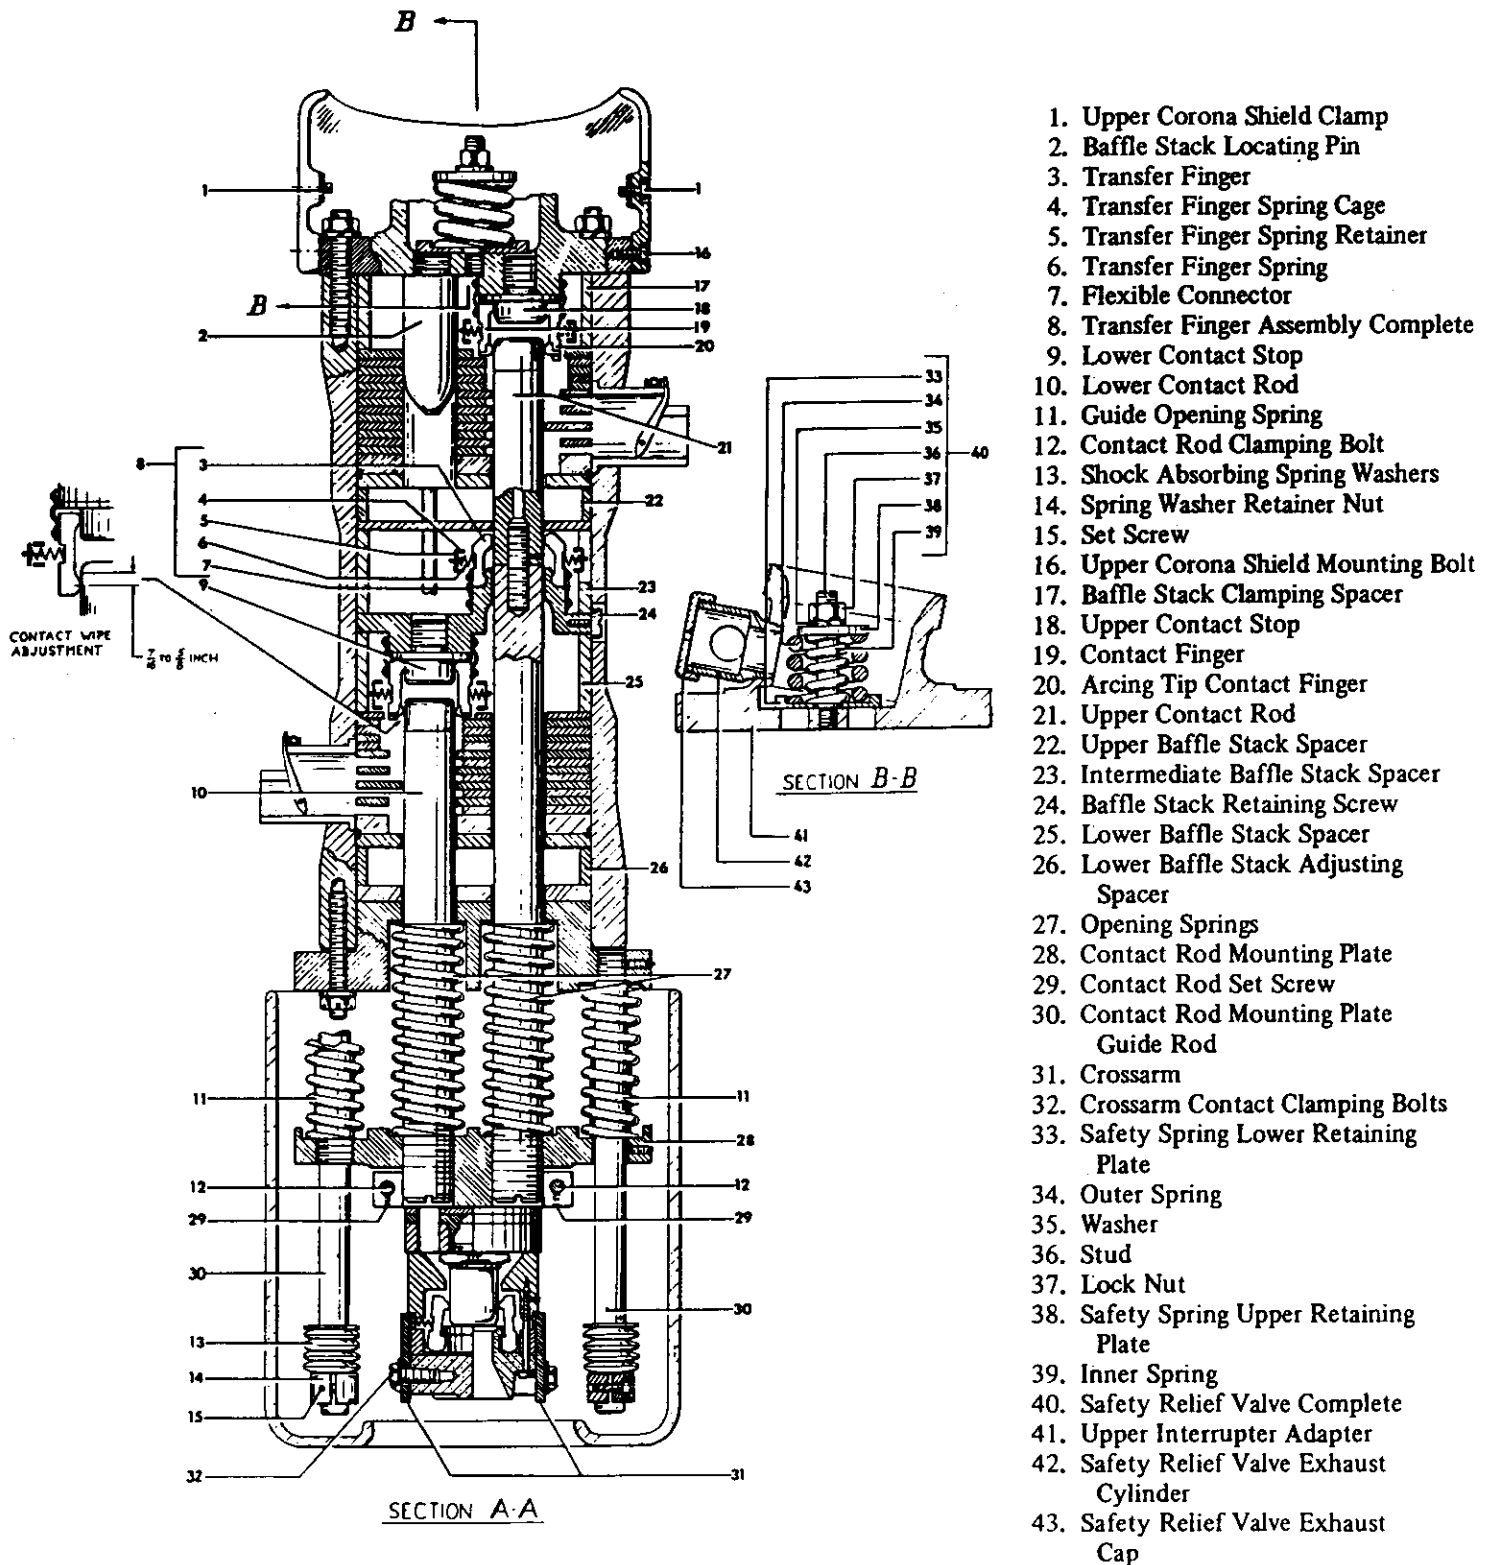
Side View of Interrupter FK-121/145 Nominal 15,000 mva
